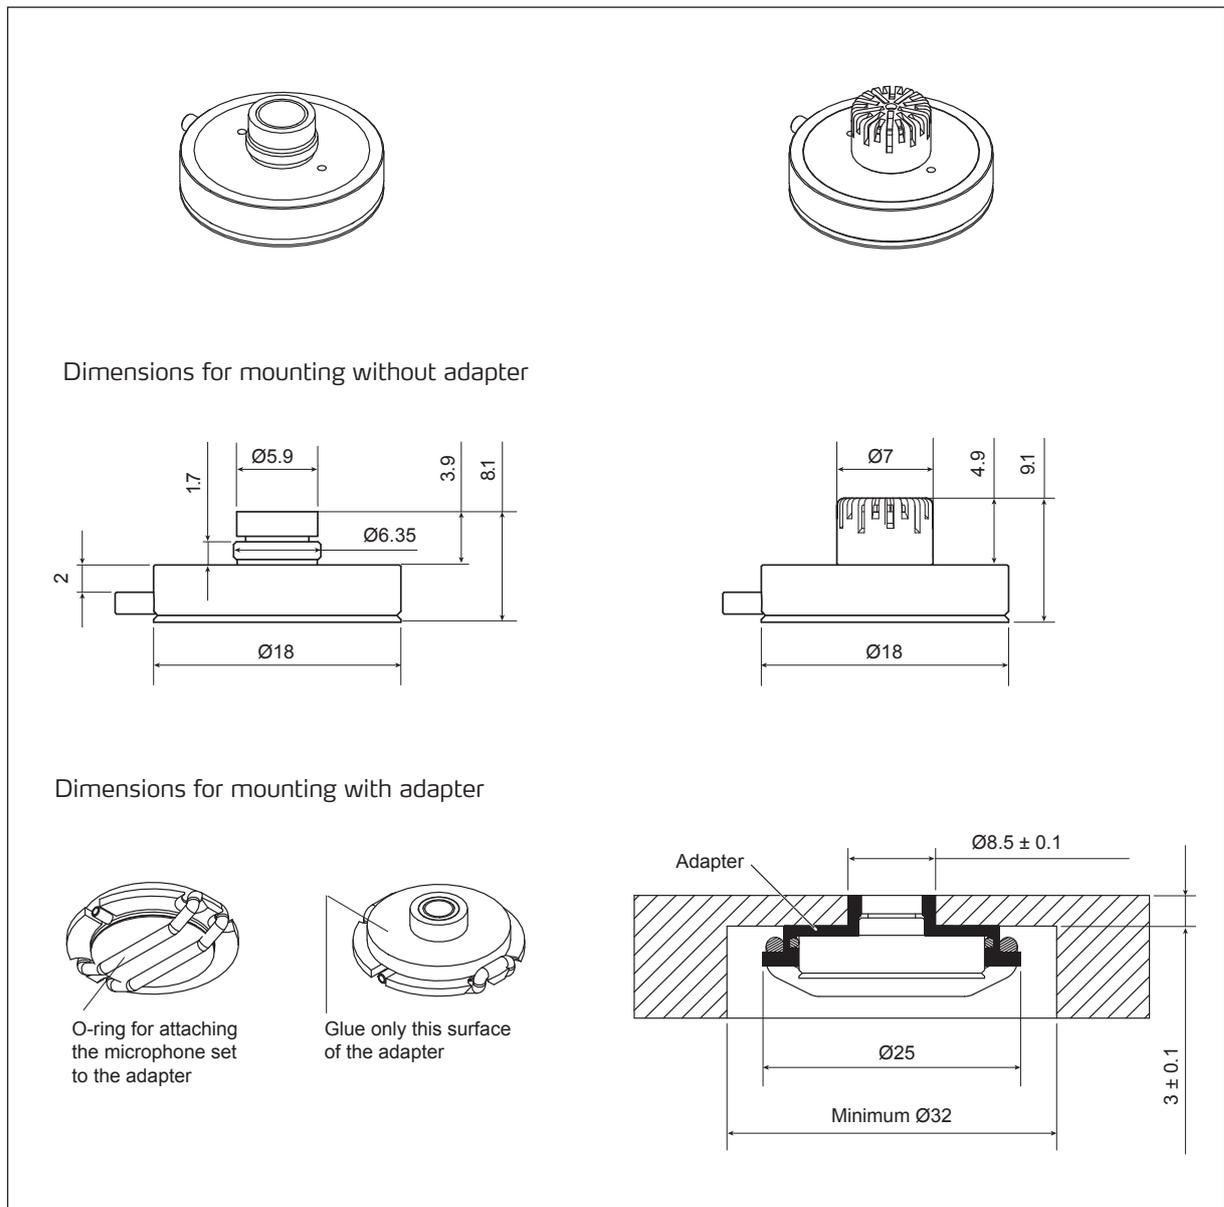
Dimensions for mounting without and with the RA0502 Mounting Adapter. All measures in mm.
